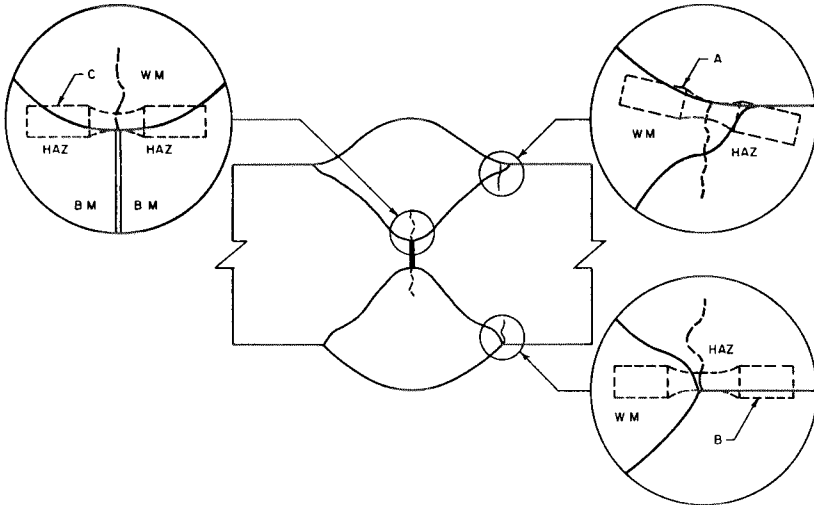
Typical locations of fatigue crack initiation in a butt weld. Fatigue cracks can initiate: in diluted, untempered weld metal (A); in the heat affected zone close to the line of fusion (B); and in tempered weld metal (C).
